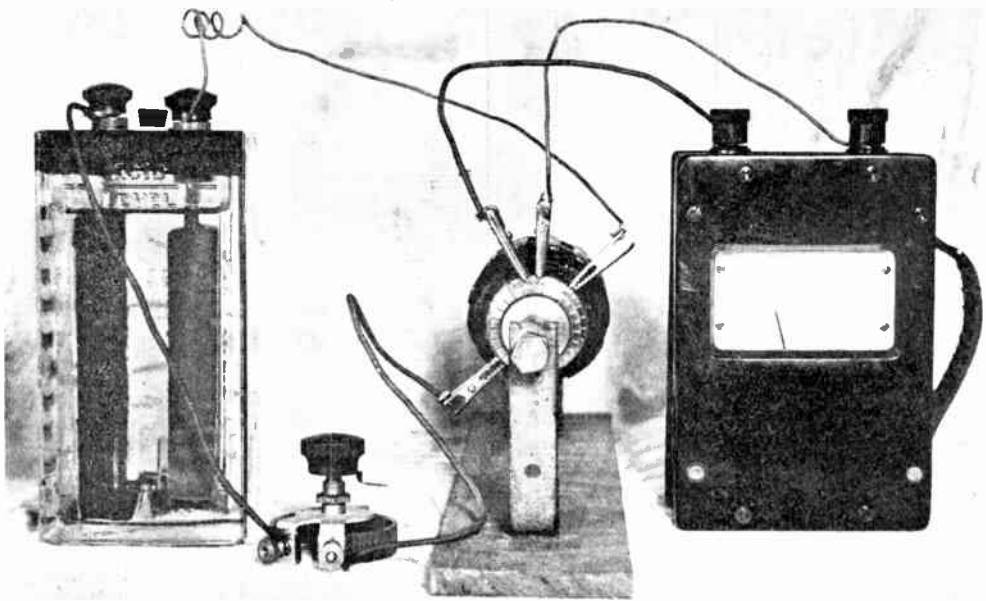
Circuit Arrangement for Testing Coils of Armature.
